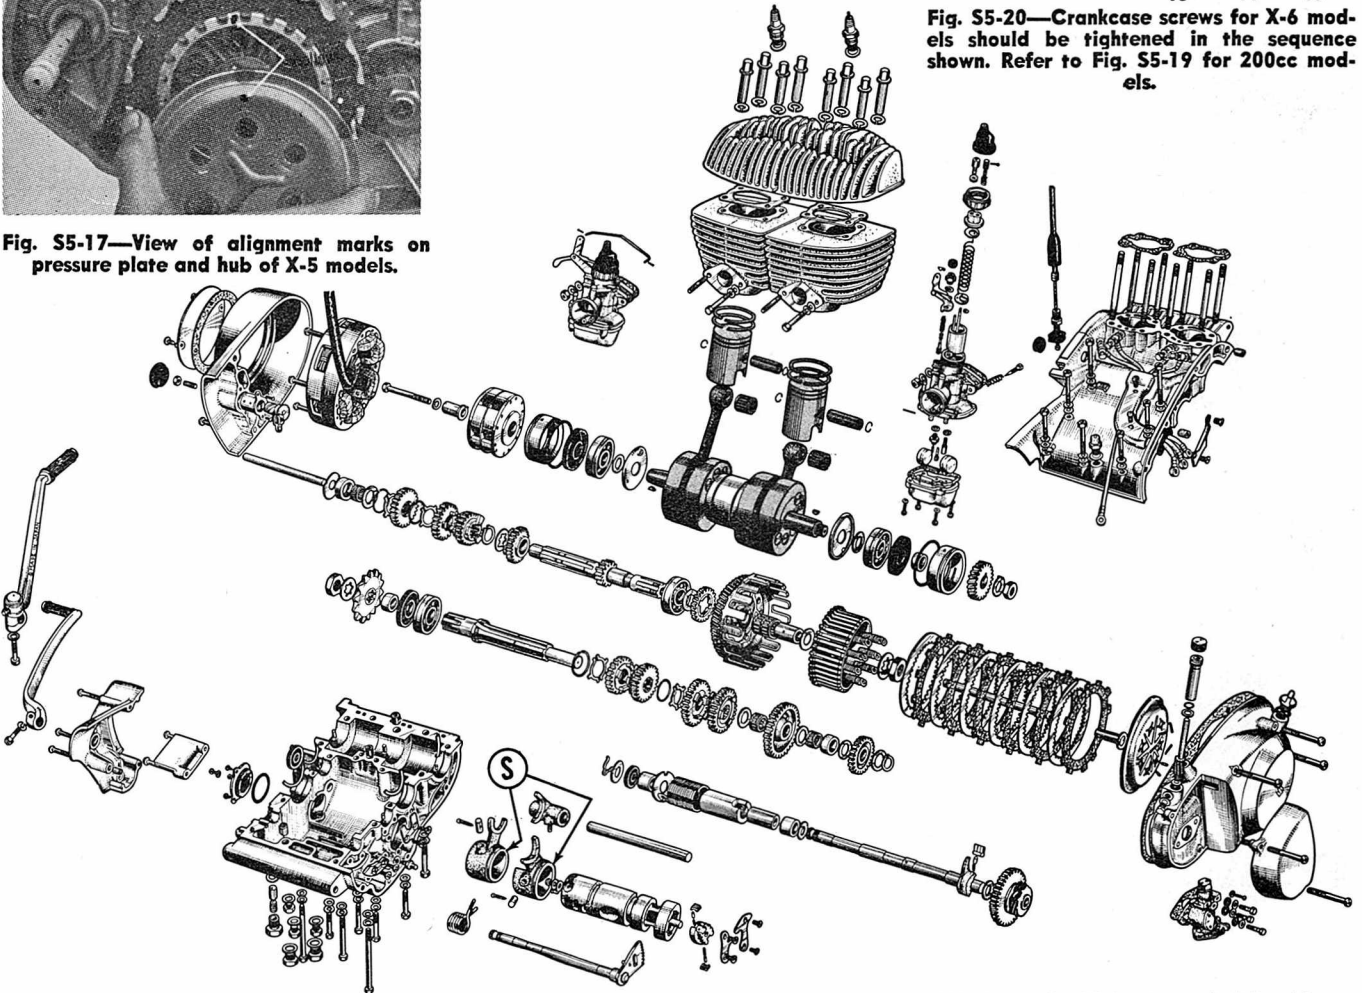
Exploded view of the X-5 engine and transmission assembly. Flanges (S) on shift forks should be toward right side as shown.
